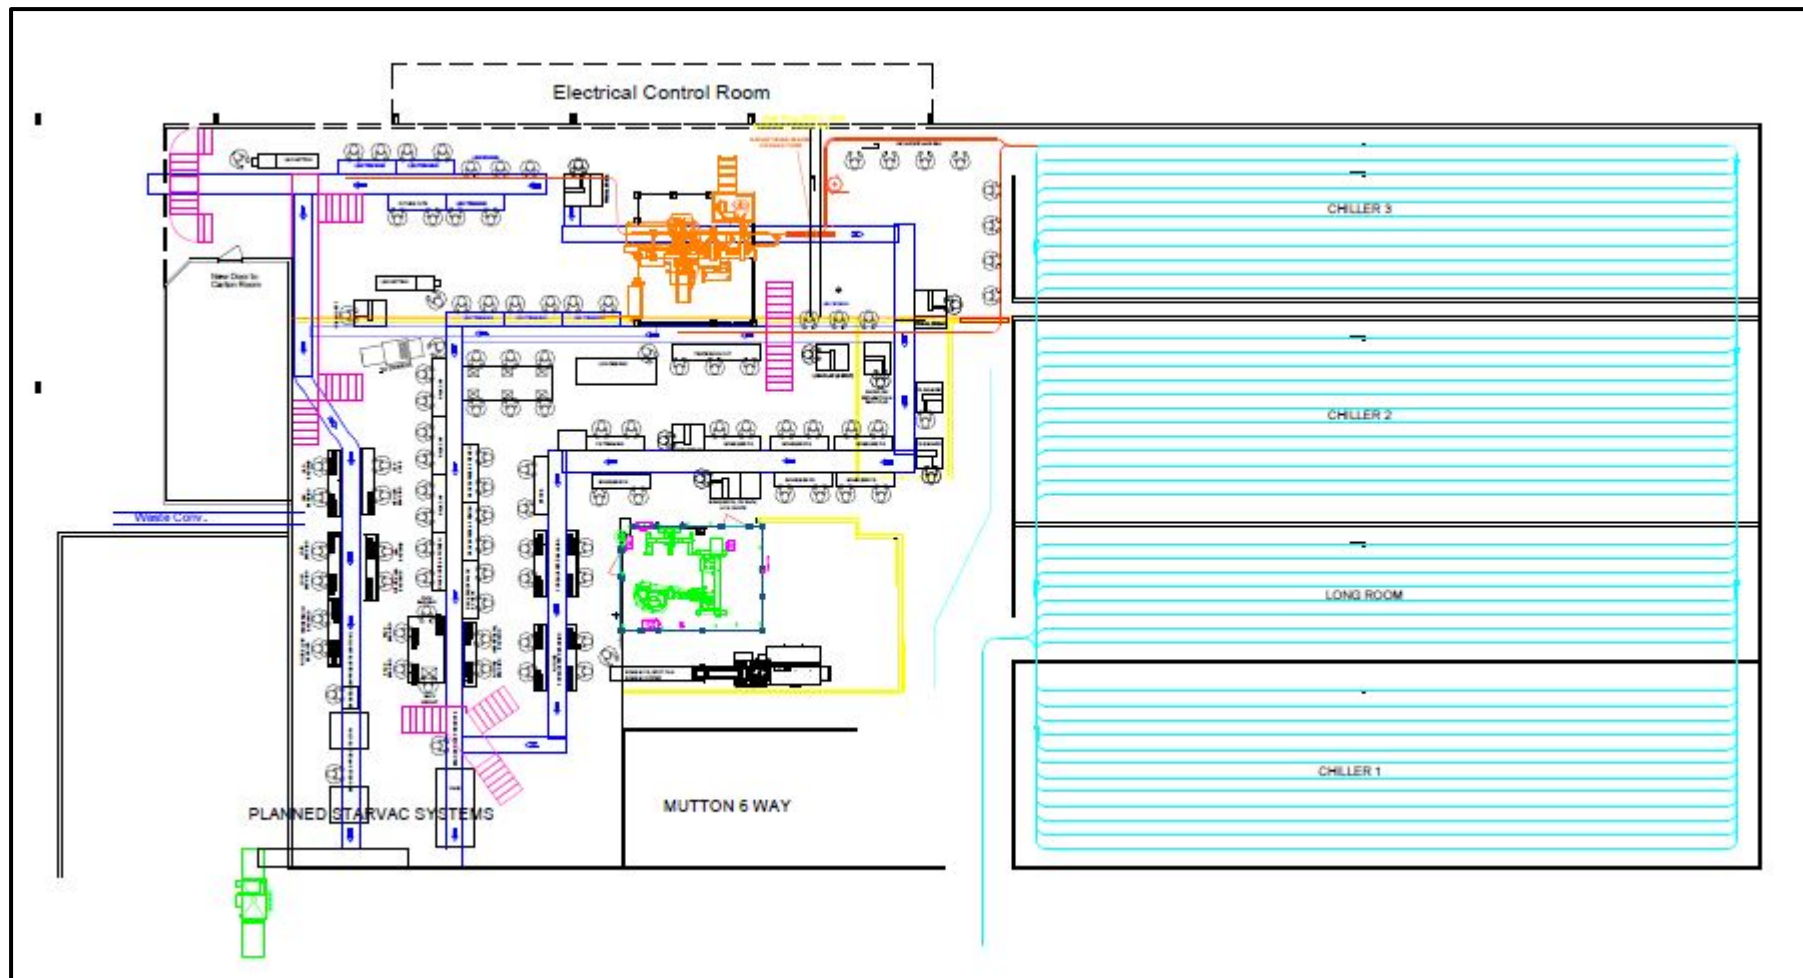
Inside Layout of Wagstaff Plant, Single Tower Primal in Orange.
